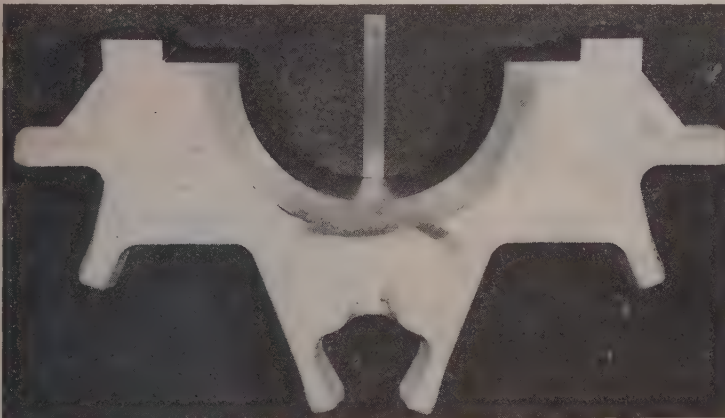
(top) — Heavy forged steel bearing saddle, one of set welded into crankcases of Alco railroad diesel engines, showing bearing cap and semicircular bore for crankshaft main bearing as broached on American duplex type vertical hydraulic machine
